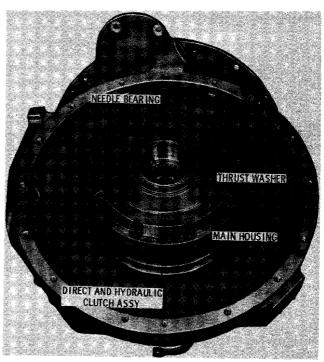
Removing (or installing) direct and hydraulic drive clutch assembly (VS series)
